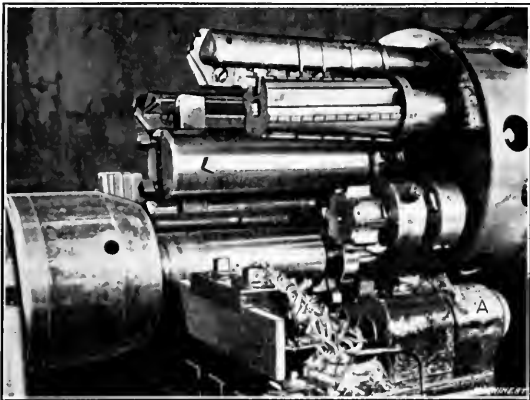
Cleveland 3 1/4-inch Automatic Screw Machine set up for making a Shrapnel Case in Twenty-five Minutes
